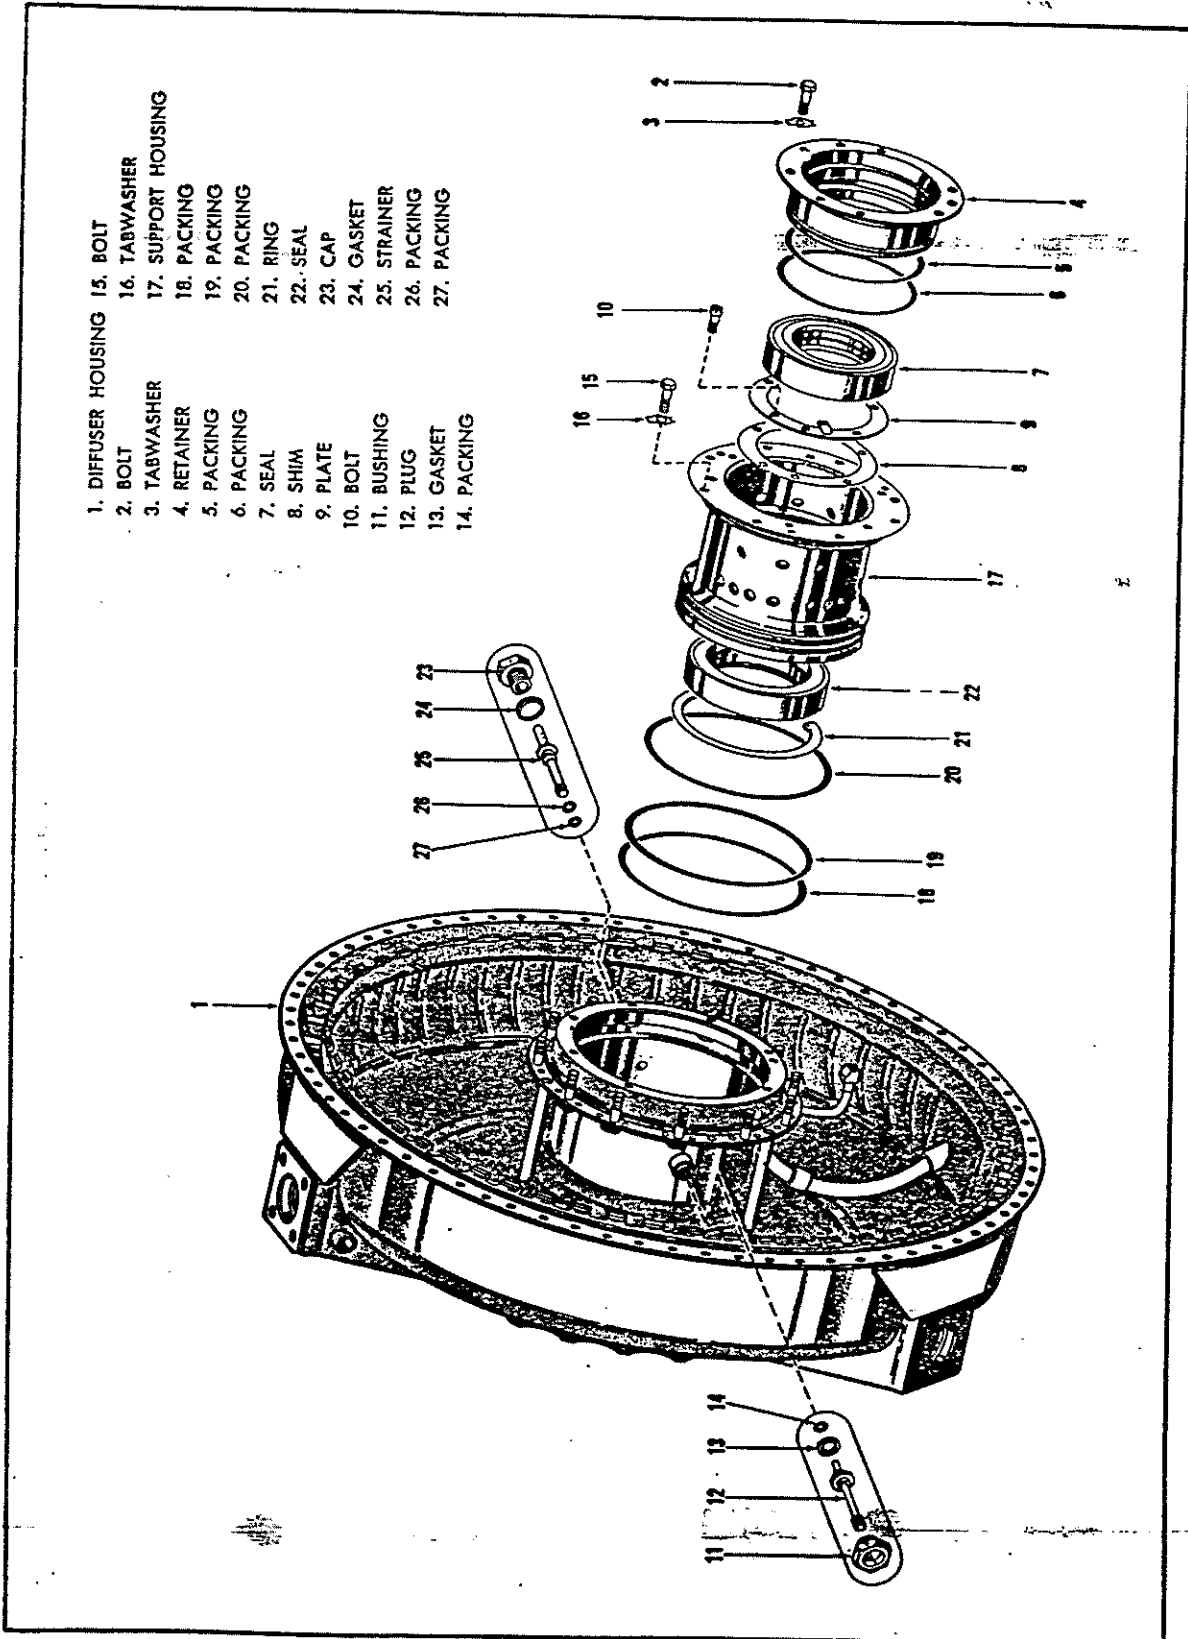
Diffuser Housing and Rear Bearing Support Housing Assembly
